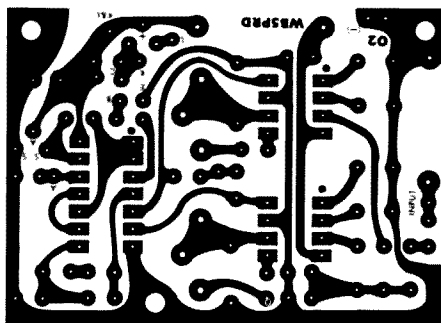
PC board, foil side. This is suitable for reproducing the board for those who would like to do so.
